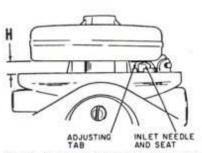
Float height (H) should be measured as shown on Walbro float carburetors. Bend adjusting tab to adjust height.
